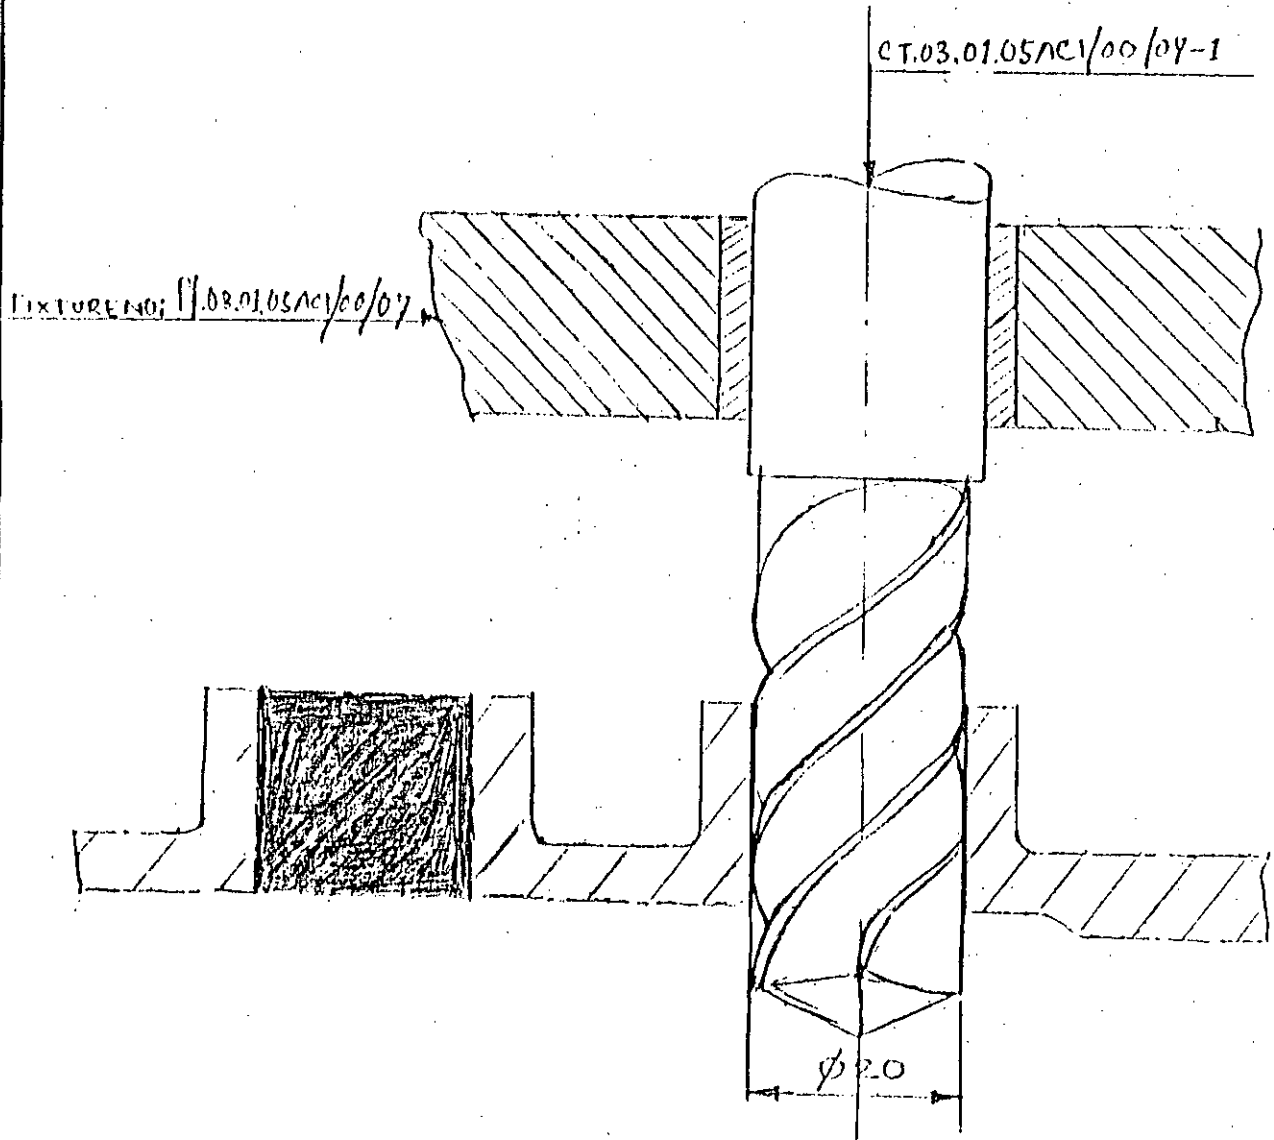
DRILLING OPERATION OF HOLE ϕ 20
